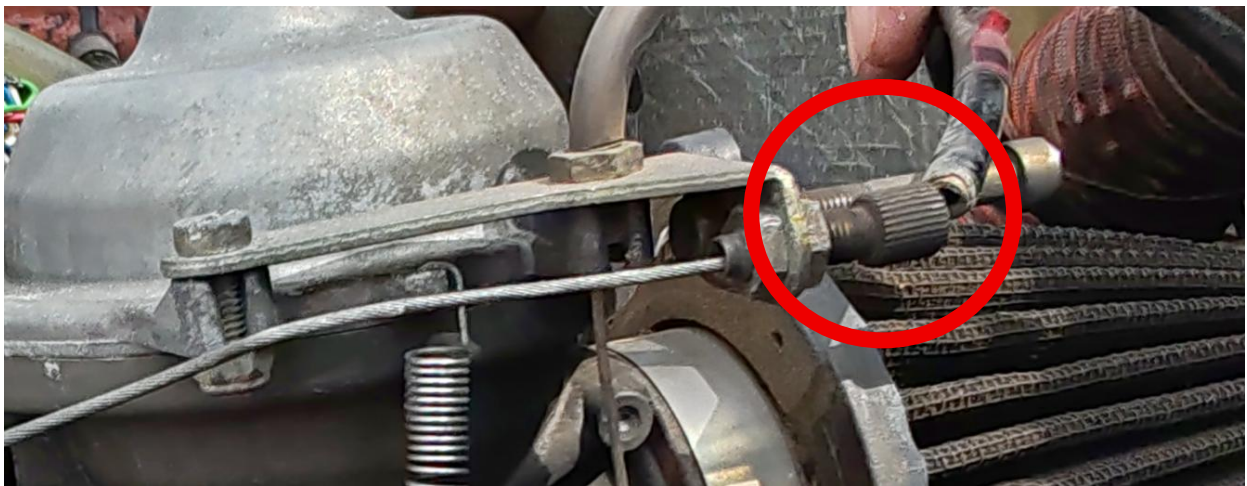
The left carburettor throttle cable sheath had dislodged from the ferrule on the carburettor bracket.
